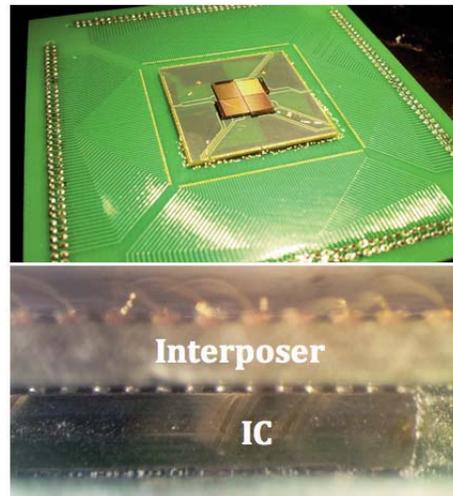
CMUT-Interposer-IC assembly wirebonded to a custom package (top). Side-view of the assembly showing the IC flip-chip bonded to the interposer (bottom).
